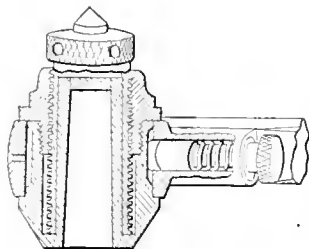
Head for No. 3 Morse Taper Shanks. Length, 3 3/4 inches; Feed, 2 3/4 inches.
